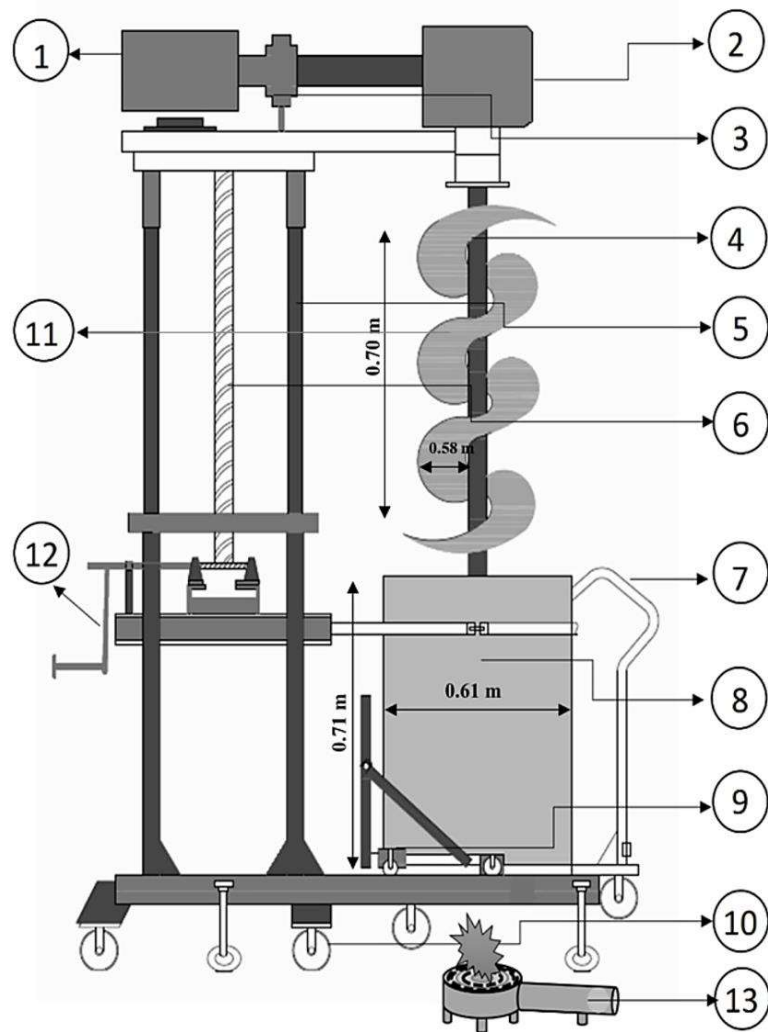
Isometric view of whole drying equipment with raised up mixing spindle before loading. (1) 2 HP motor, (2) gearbox, (3) coupling of motor and spindle, (4) mixing spindle, (5) main support system of the equipment, (6) screw jack lever, (7) mobile cart (8) drying and mixing drum, (9) rail for drum wheel, (10) castor wheels, (11) helical mixing blade, (12) hand wheel handle for spindle operation, and (13) burner fuelled by LPG
